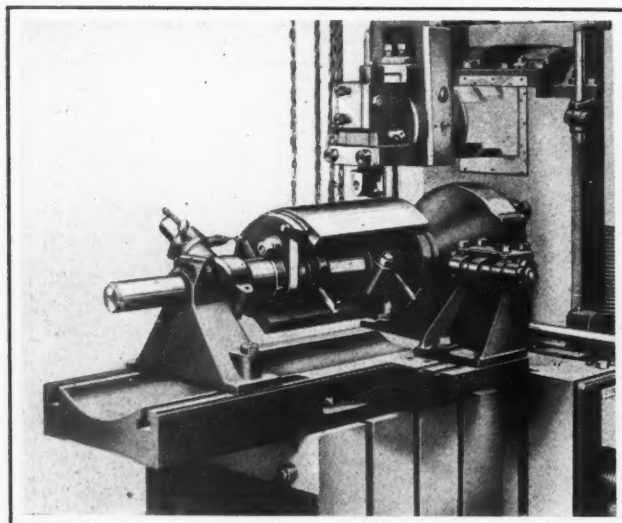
Construction of the Shell or Crown-brass Planing Attachment
